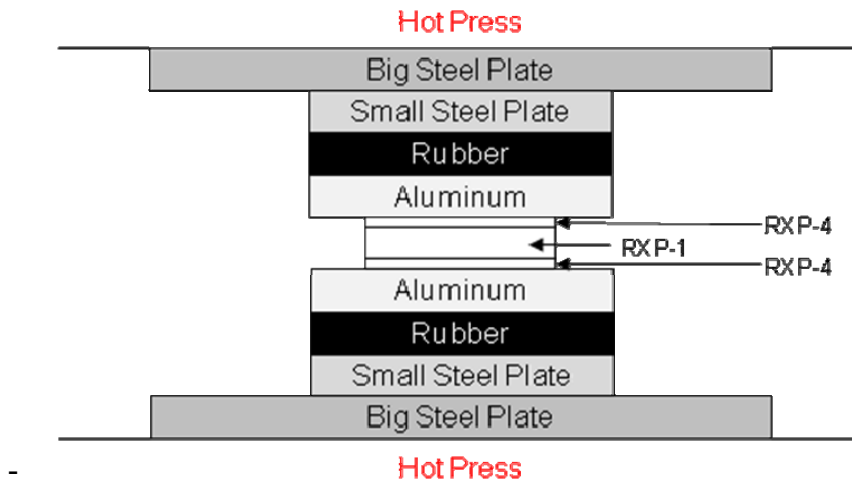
Stack-up layer inside of hot press to laminate RXP-4 build-up layers on RXP-1 core
